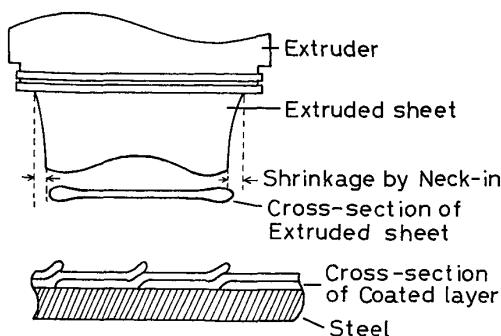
Relation between the cross-section of extruded polyethylene sheet with neck-in and the appearance of coated polyethylene layer.
